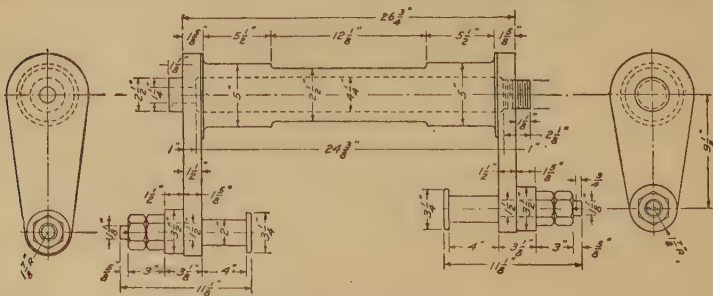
An incorrect drawing to be checked for errors (rocker arm).
